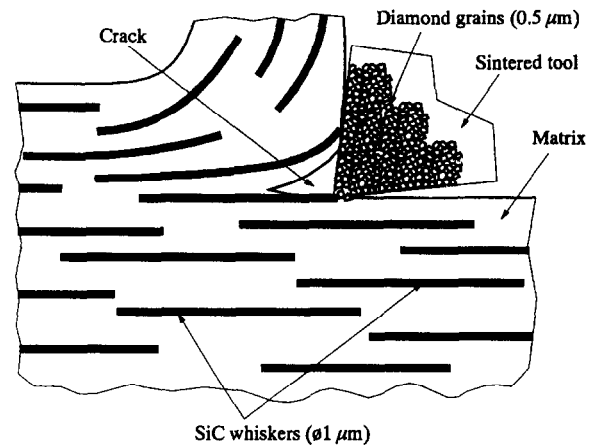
Cutting model of L type composite with fine-grain sintered diamond tool.
